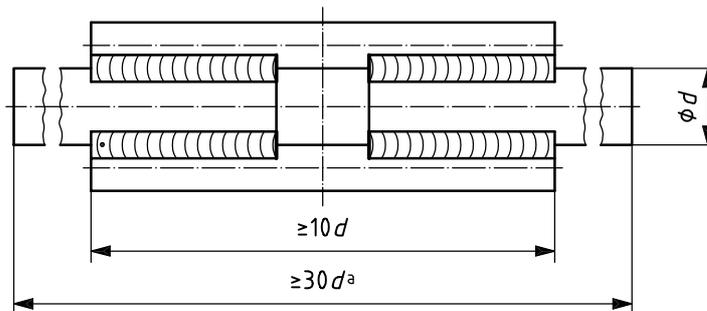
Test specimen for butt joint (tensile and bend test)
